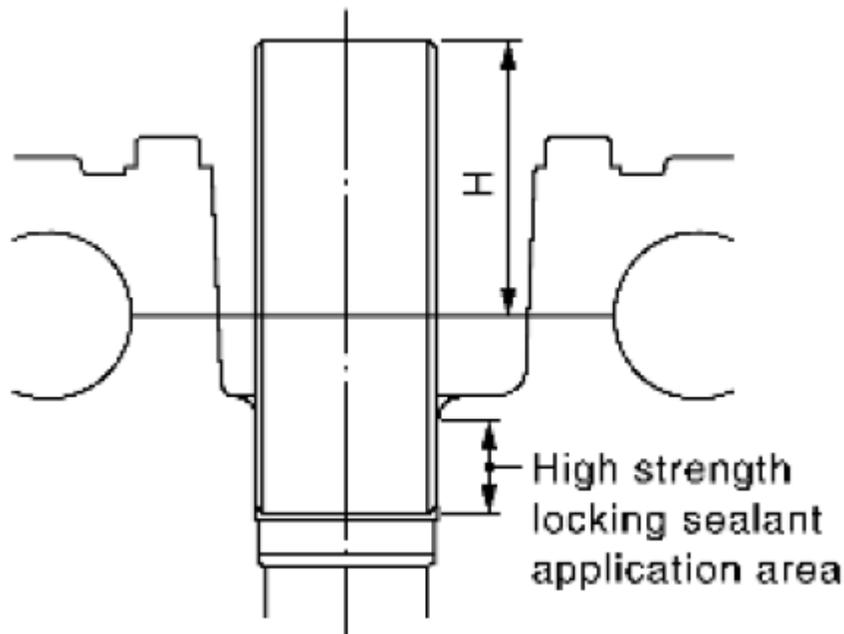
Identifying Height For Press-Fit Spark Plug Tube
